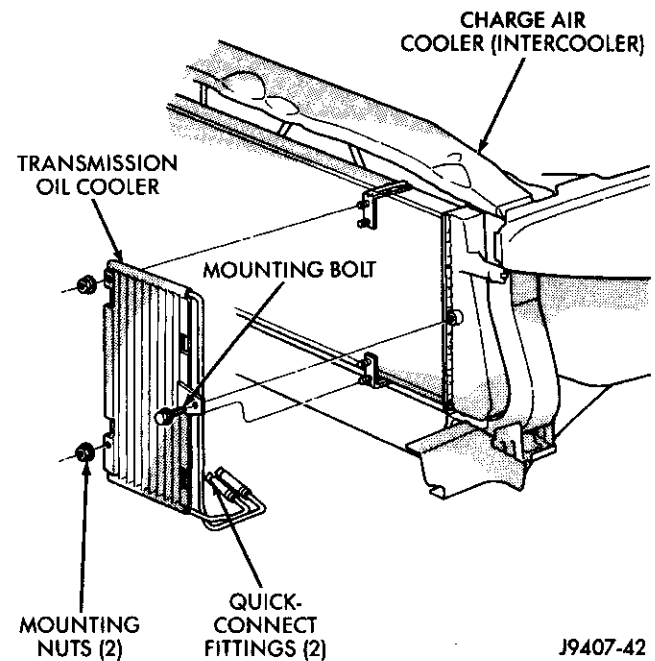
Auxiliary Transmission Oil Cooler—Diesel Engine
